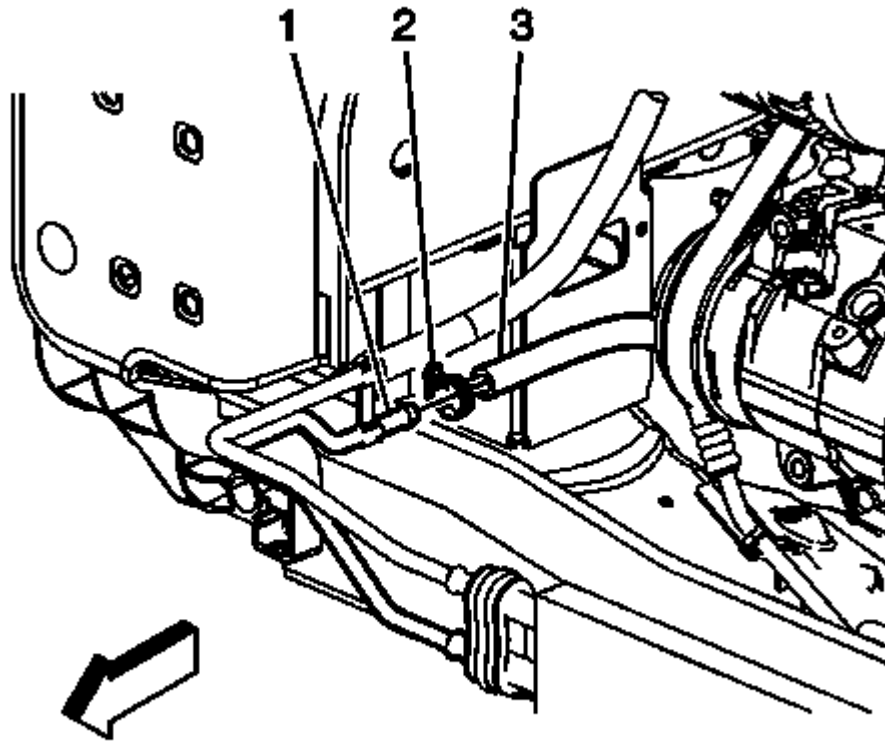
Identifying Power Steering Fluid Cooler, Power Steering Cooler Pipe & Clamp
